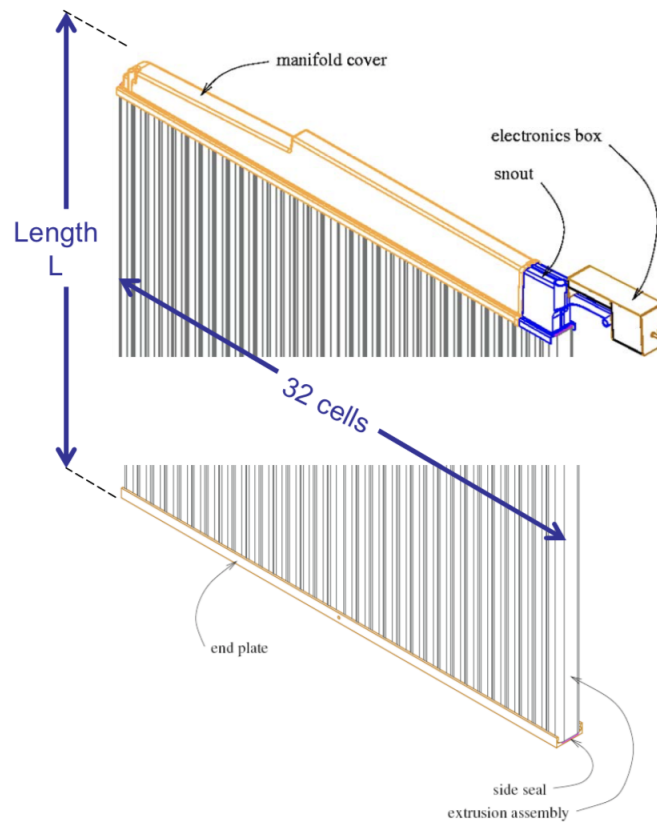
Schematic of an extrusion module, constructed from two extrusions, an end plate, manifold cover, snout, and electronics box. Figure taken from [66].
